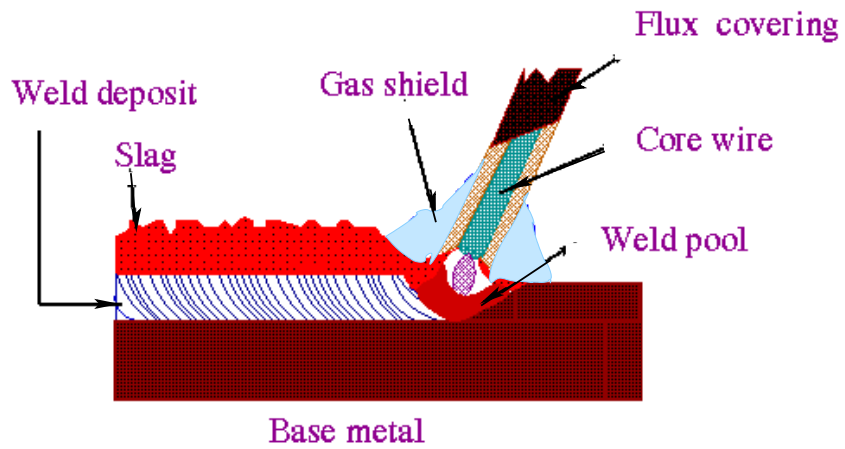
Schematic view of manual metal arc welding (MMAW).
